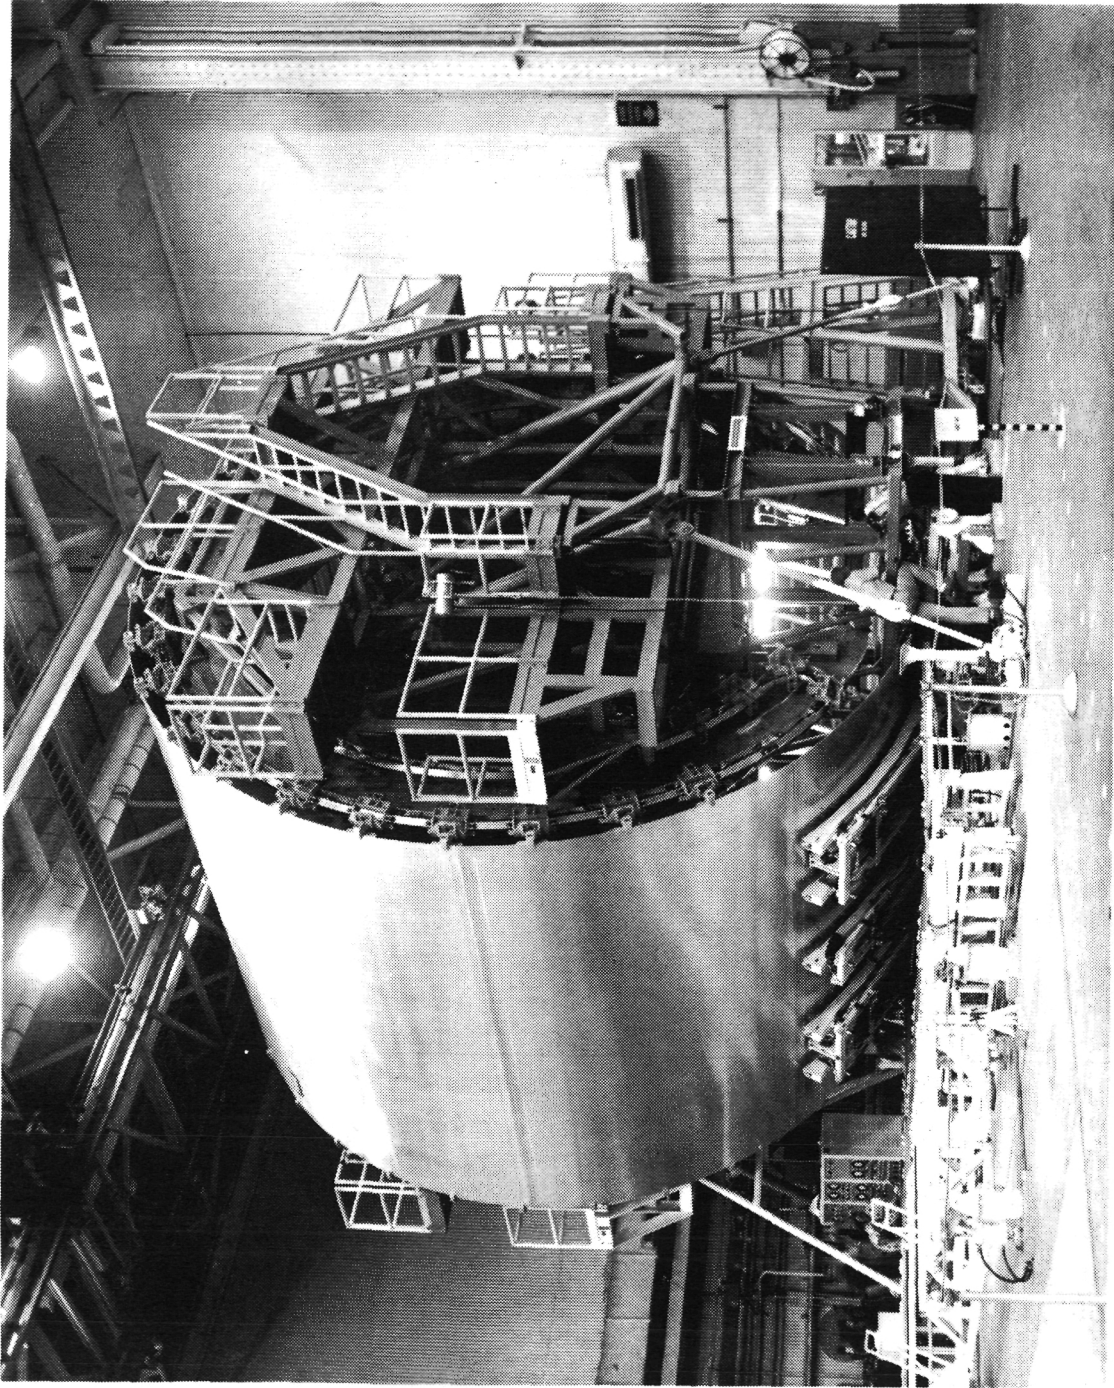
LH₂ barrel trim-and-weld fixture.
